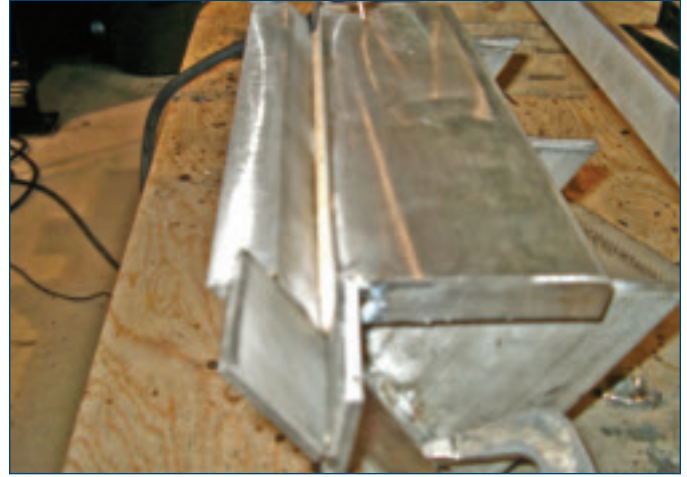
Exterior corner joint prepared during weld procedure development. (Photo courtesy of Avesta Welding, LLC, Ron Stahura, photographer.)
